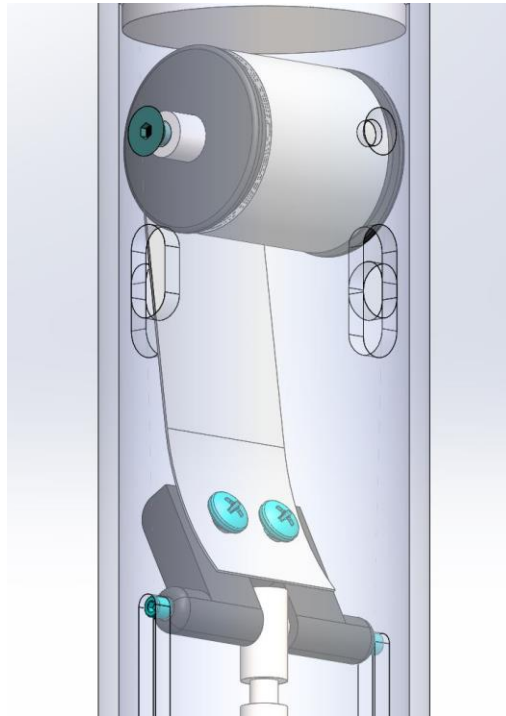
Constant force spring sub-assembly with retracted spring.
